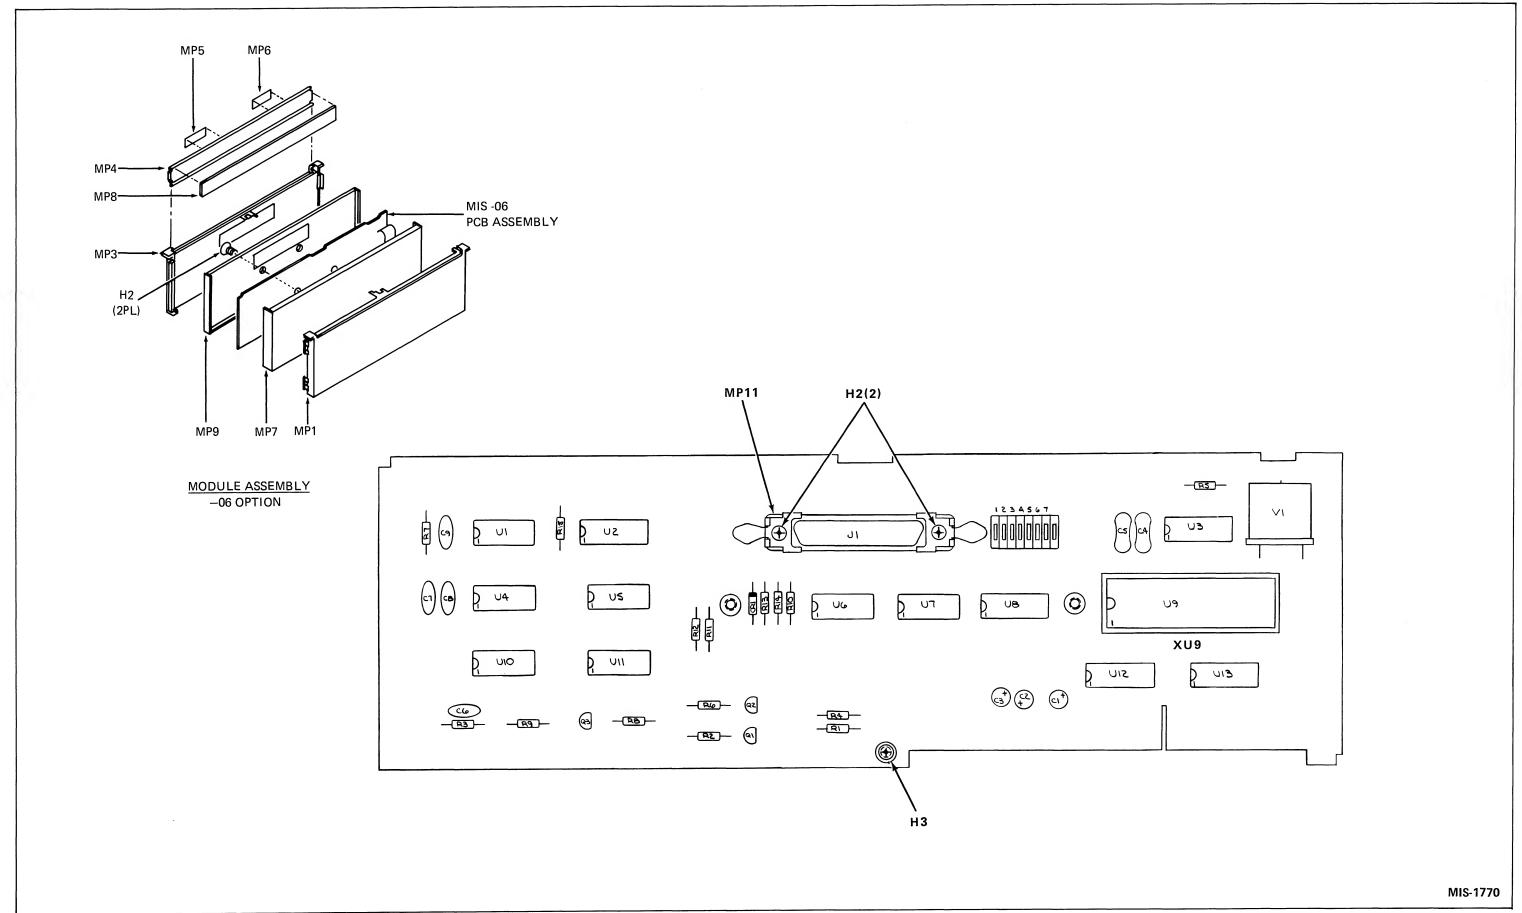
Bit Serial Asynchronous Interface PCB Assembly
